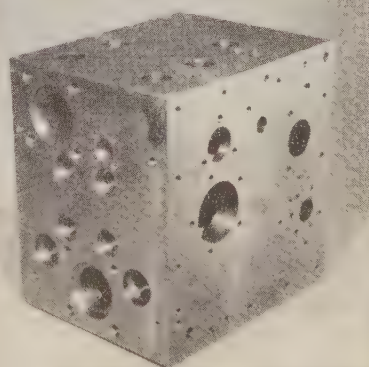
This small hydraulic cylinder casting was tested successfully at 32,000 psi
